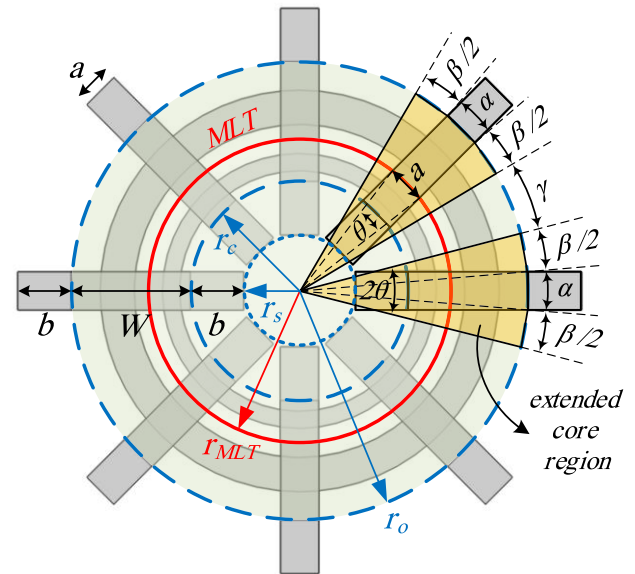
A top view of a shell-type Transformer with a regular polygonal core (segmented-core) structure.
